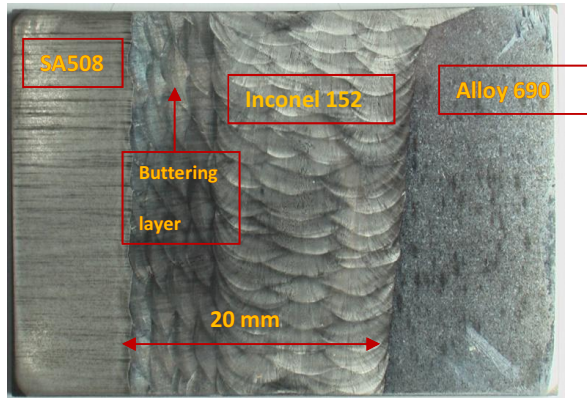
MHI plate sample. Cross-section of the weldment. It has been etched to reveal the macrostructure: SA508, weld-passes in Inconel 152, Alloy 690. The different orientation of the weld-passes reveals the buttering layer on the SA508 side of the weld. It is made to limit the diffusion at the interface.
